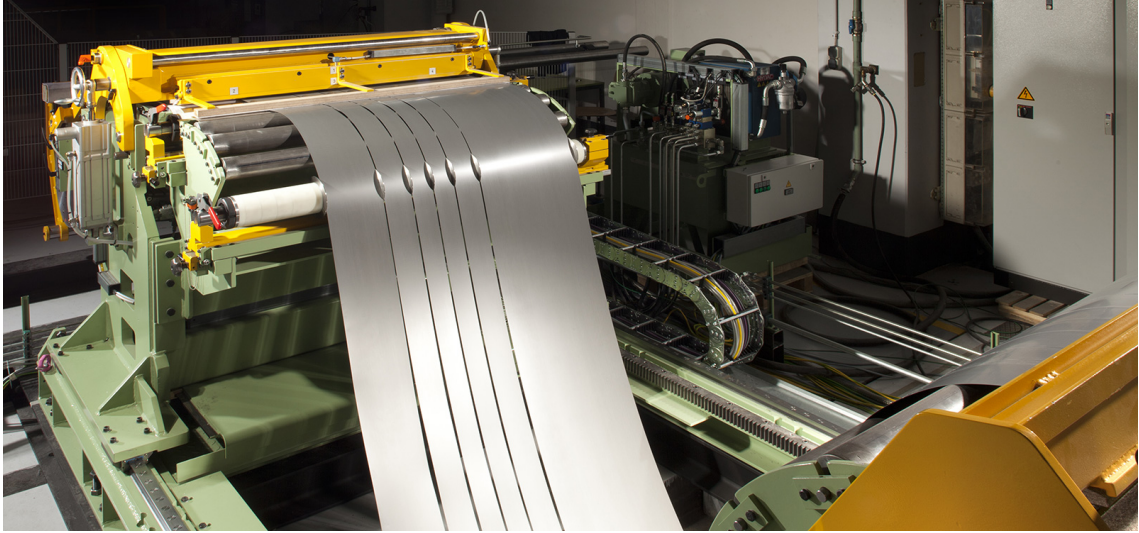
Slitting machine for electrical steel, adapted from [63].
